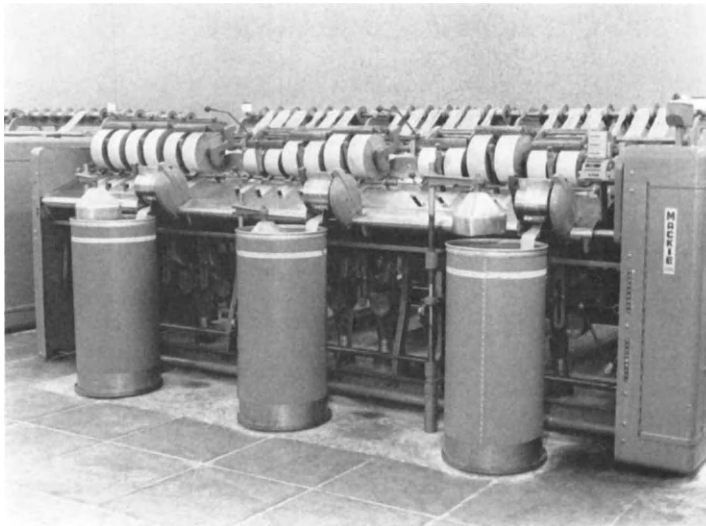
Flax line first drawing frame. Multi-head open screw gill faller pin fibre control is used in the drafting zone of this machine. Each head has six slivers drafted alongside each other; they are then combined together at the front doubling plate, which is clearly visible between the cans and the front rollers of the drafting zone. Each sliver is
